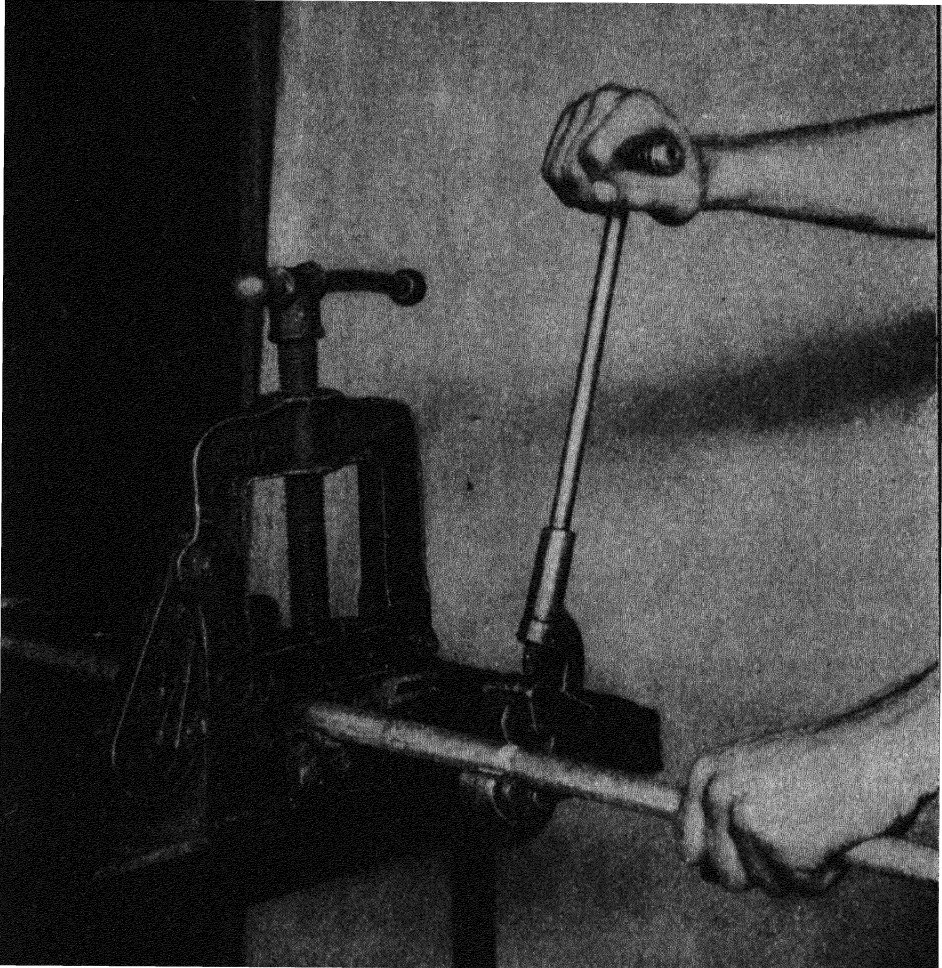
Cutting pipe with a pipe cutter.
